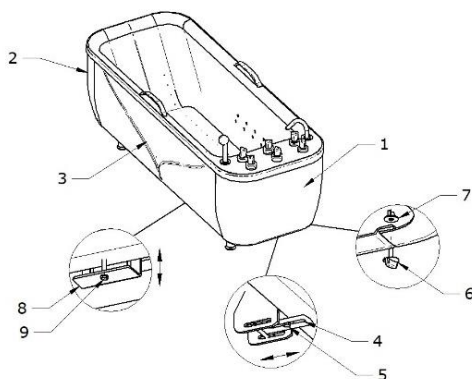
BALMED ECO and STANDARD 300 I bathtub view with cover elements
